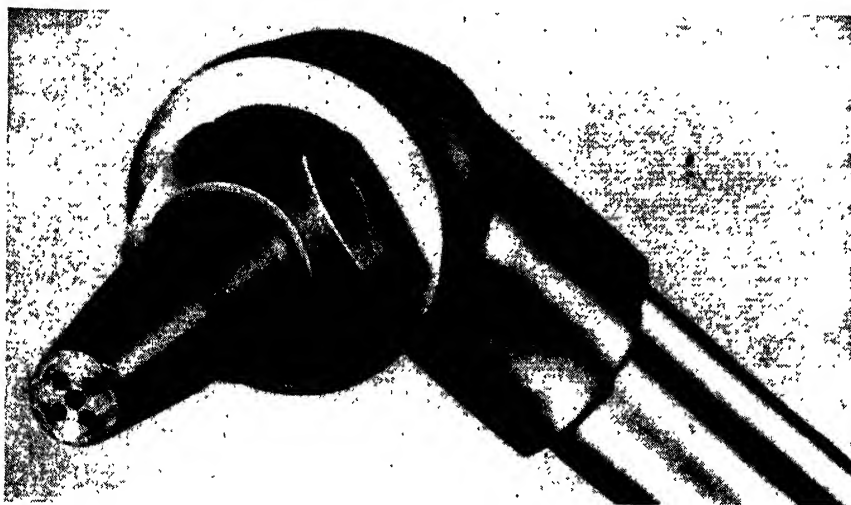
The tip of a cutting torch. The outer holes supply the gases for preheating flames, and the center one supplies the high-pressure oxygen for cutting.
